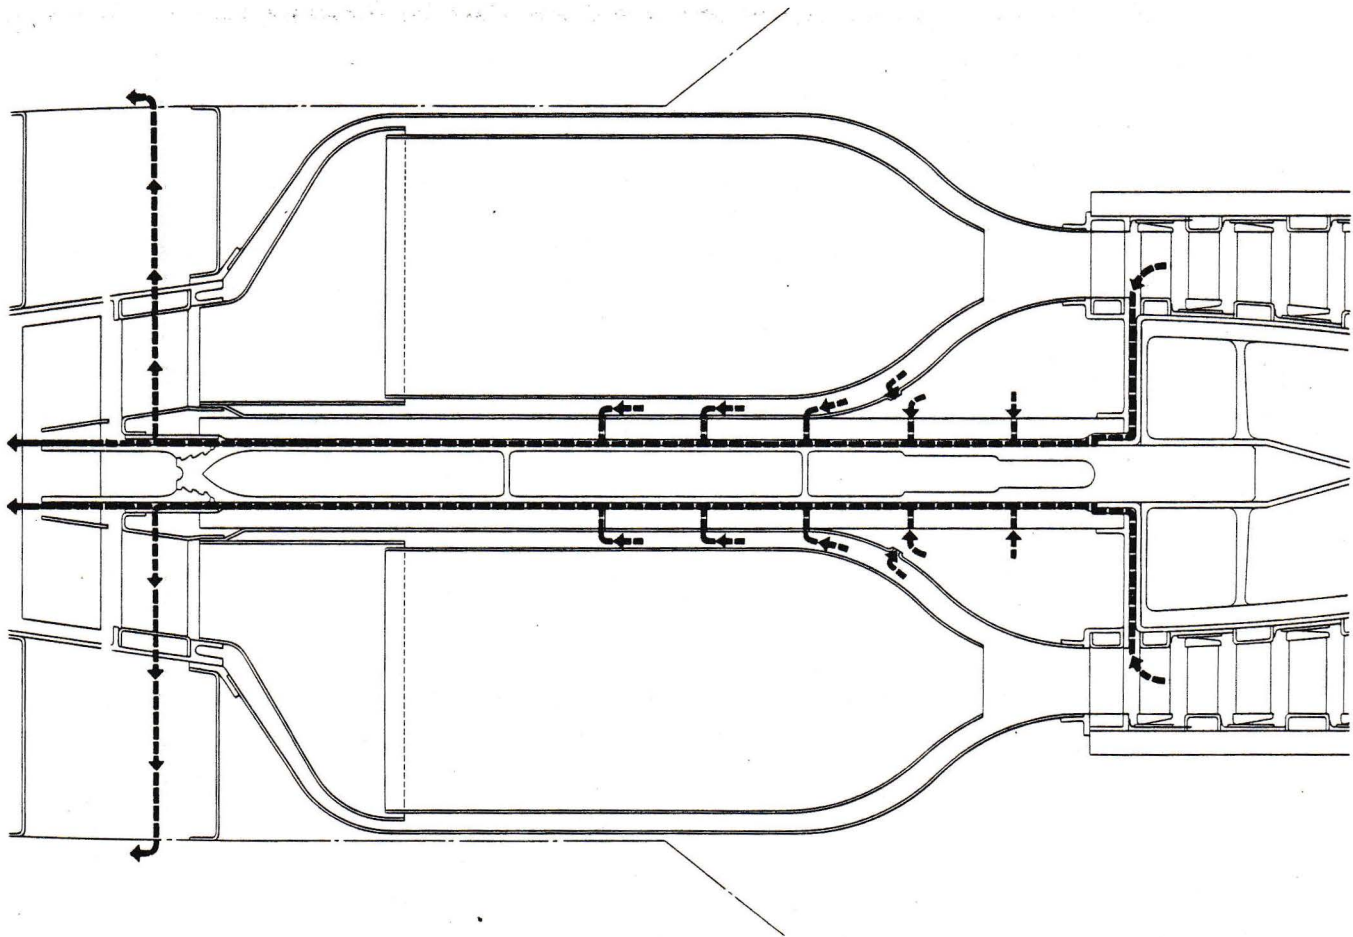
CROSS-SECTION SHOWING BEARING AIRFLOW
